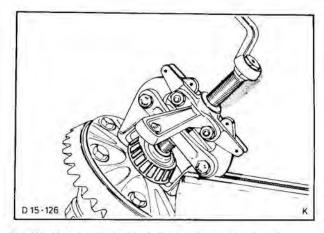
Clamp special tool in vice by one leg and detach bearing
